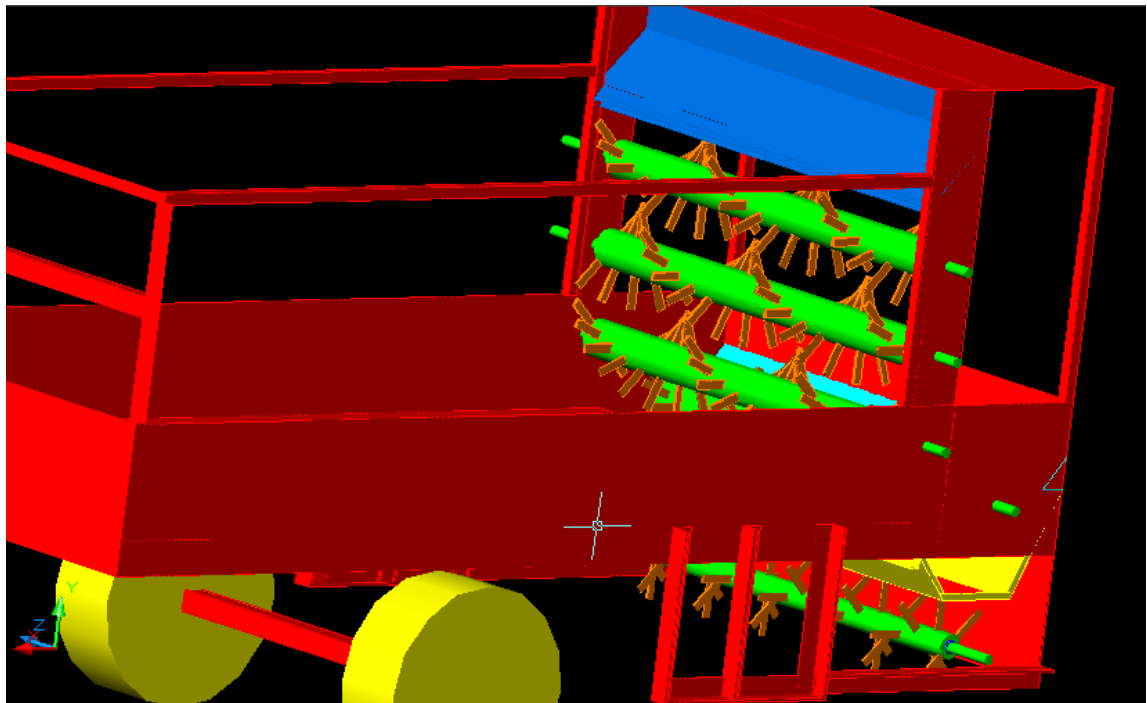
3-D AutoCAD Drawing of “Super Gray” with Modifications
